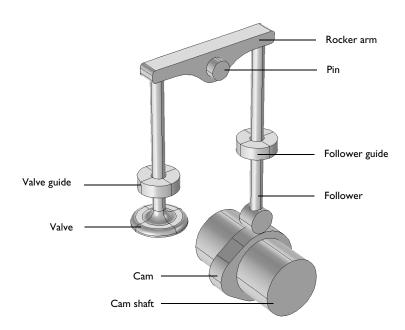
Geometry of a valve opening mechanism with a rocker arm and a radial cam.
